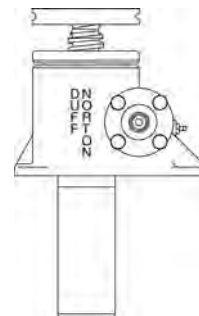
Upright translating machine screw actuator. (Duff Norton.)
